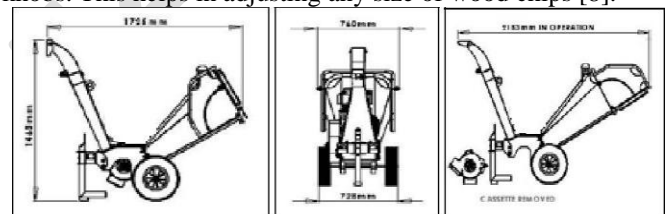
Main proposed process unit of wood chipper cutter machine showing the inlet and outlet manifold from different views.
